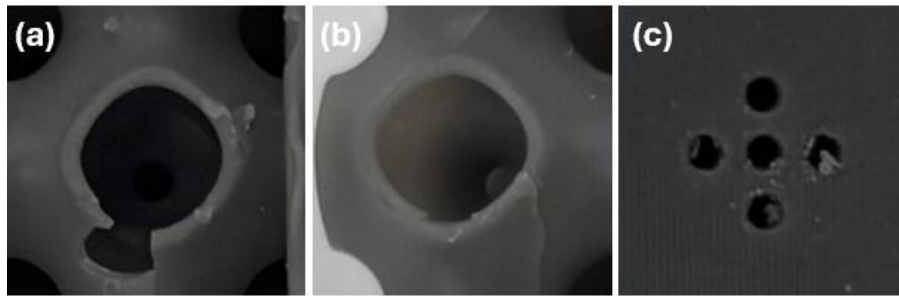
Structural defects in the form of (a) chips, (b) cracks, and (c) face sheet perforation blockages.
